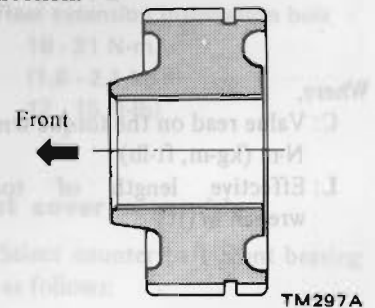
Installing OD-reverse Synchronizer Hub
